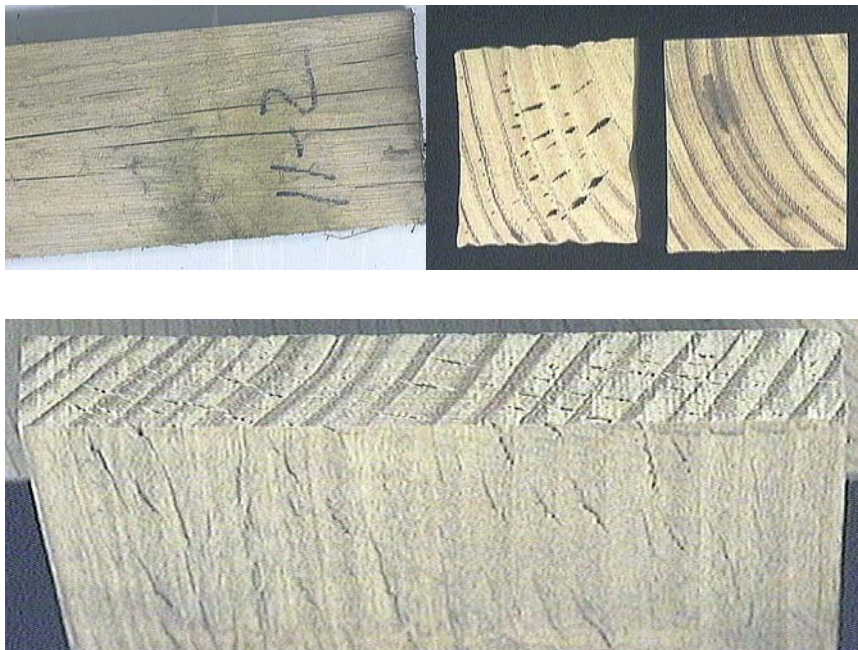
Surface (top left) and internal checking. Note the appearance of internal checks where they are exposed on the surface of the specimen below
